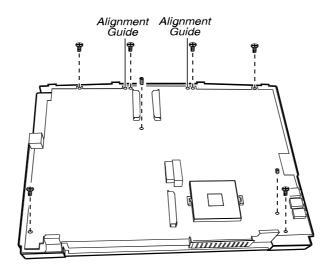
REMOVING THE SIX SCREWS AND TWO HEXNUT SCREWS FROM SYSTEM BOARD
